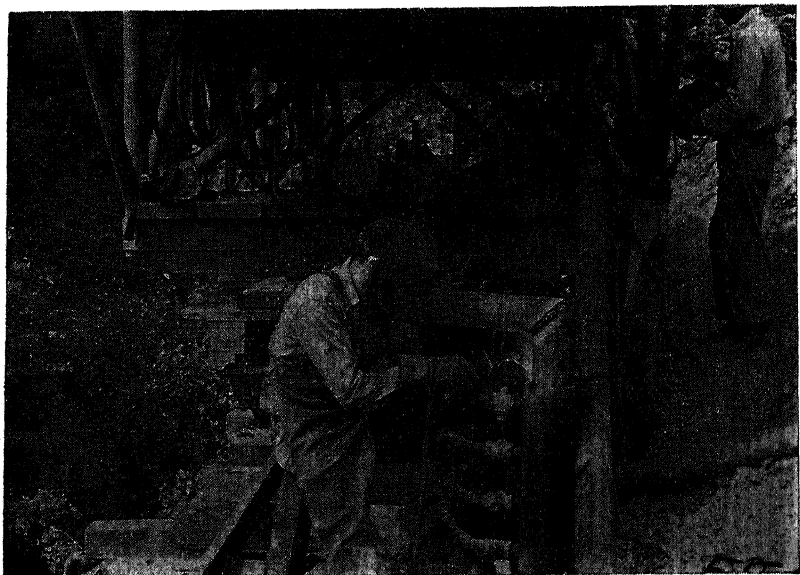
Welding a pipe elbow into a manifold for a drilling "jumbo" for a tunnel on a large dam project in the west.
